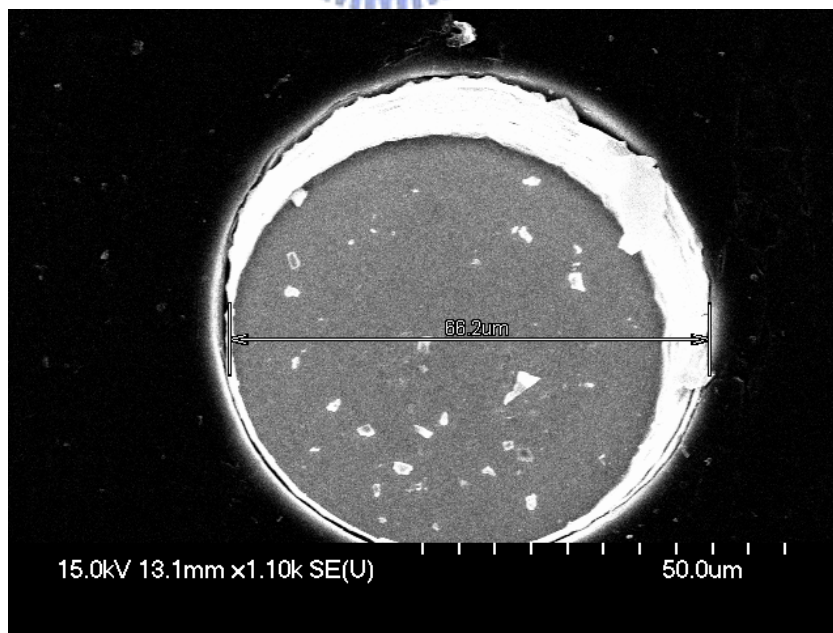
Detailed top view of the developed dry film with cladding metals.
